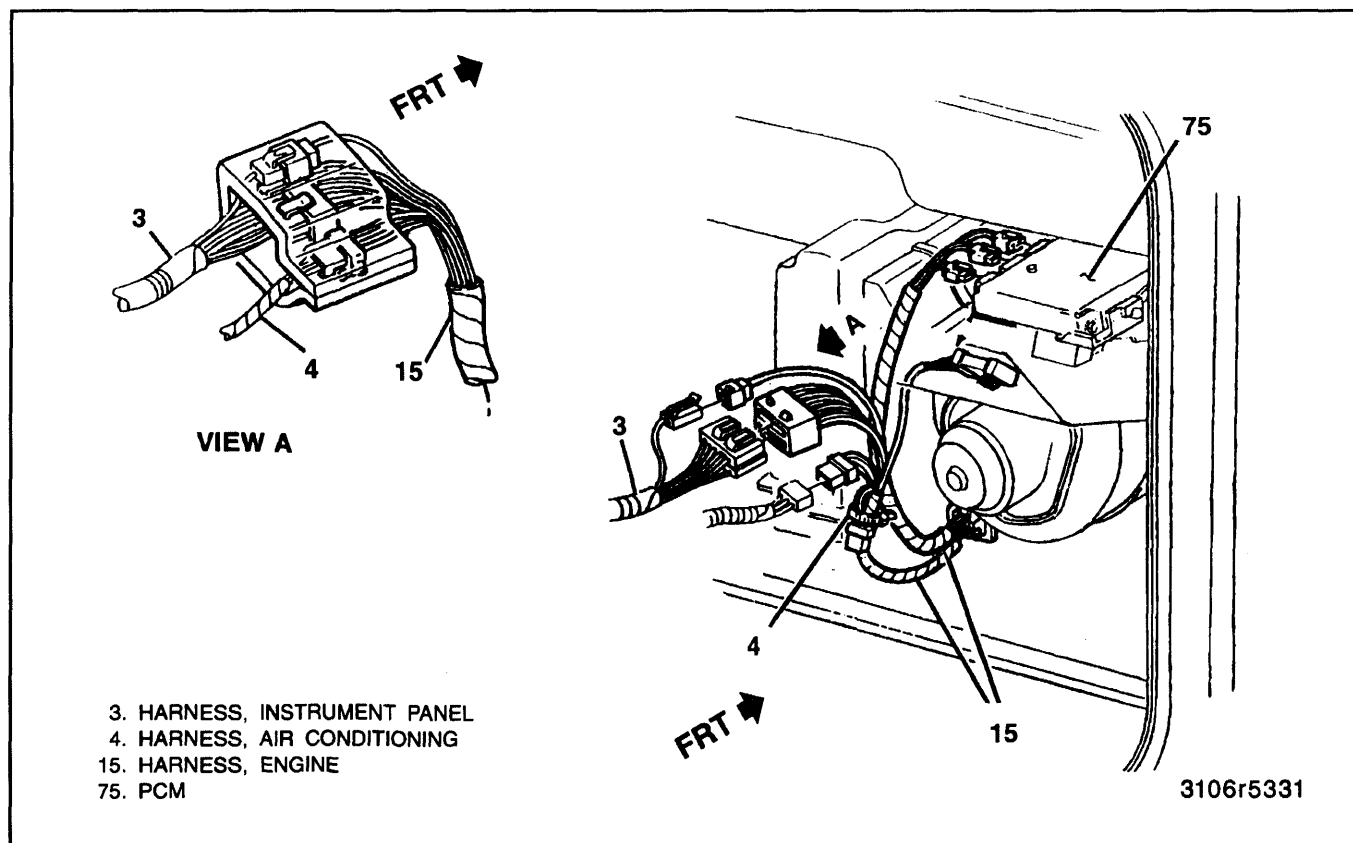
Engine Wiring to the Control Module (Diesel Engines)
